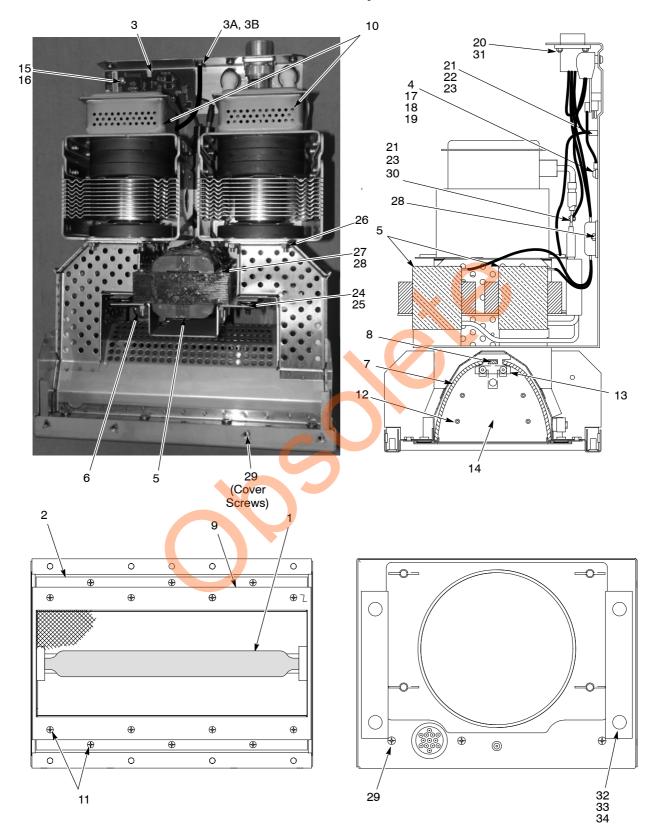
CoolWave 2 External Blower Lamphead (shown with cover removed)
